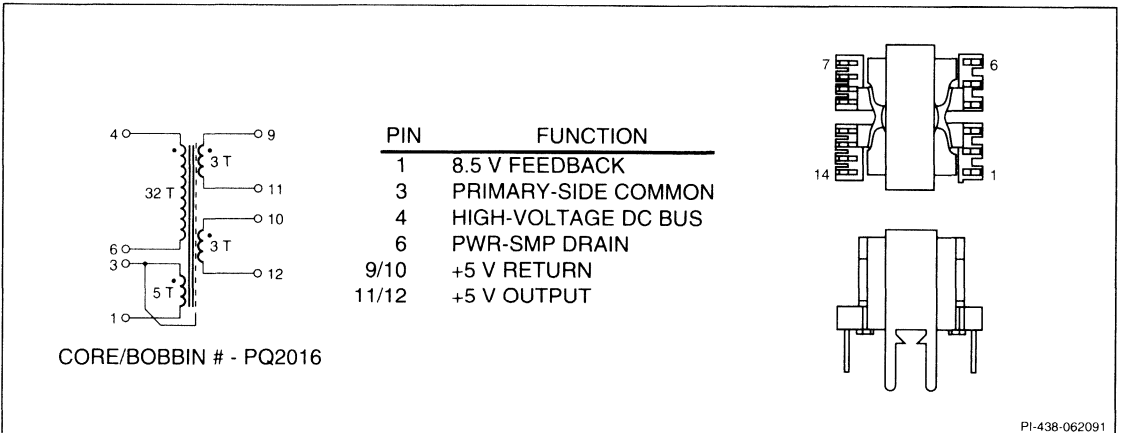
T1004 Transformer Pinout and Physical Dimensions¹.
